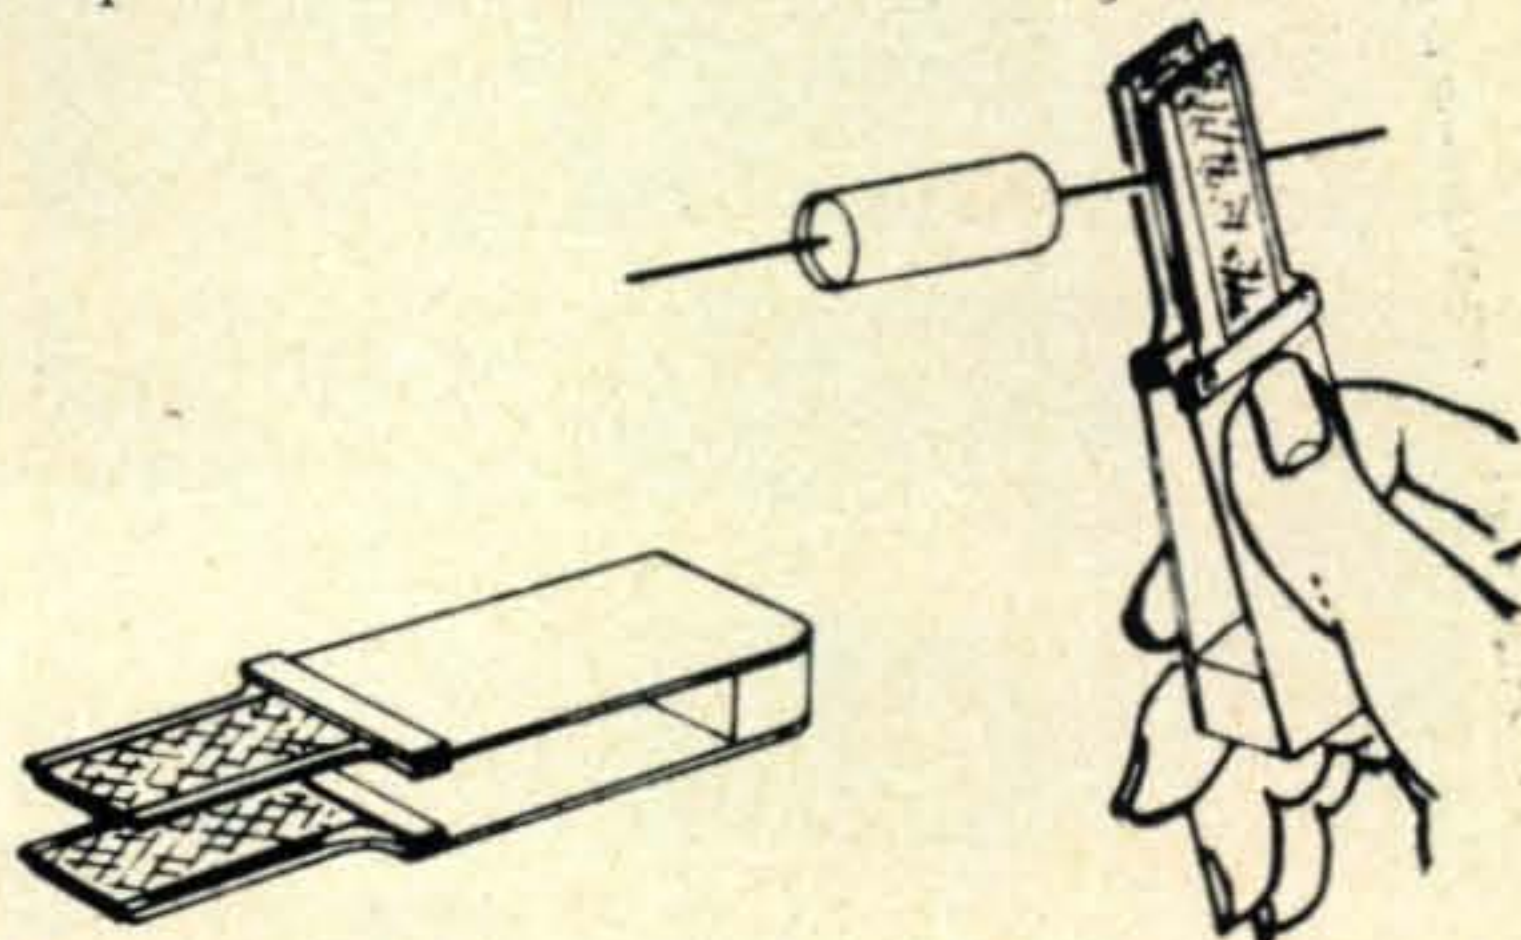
Shown above is a lead cleaning tool and the proper method of cleaning a component lead before soldering.
